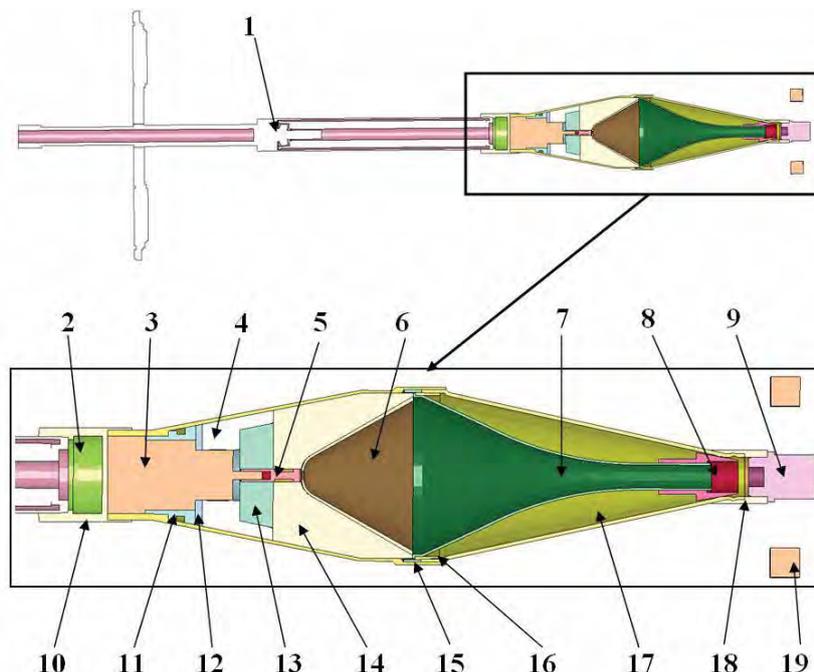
PG-7G warhead section: 1 – rocket engine, 2 – rocket engine nozzles, 3 – bottom side of detonator, 4 – explosive material – bottom part, 5 – conductor, 6 – conical liner, 7 – conductive cone, 8 – insulator, 9 – warhead part of detonator, 10 – warhead frame, 11 – determining element, 12 – disc, 13 – shutter, 14 – explosive material – upper part, 15 – insulator, 16 – insulating ring, 17 – ballistic cap, 18 – upper detonator part fixing element, 19 – angle bars
